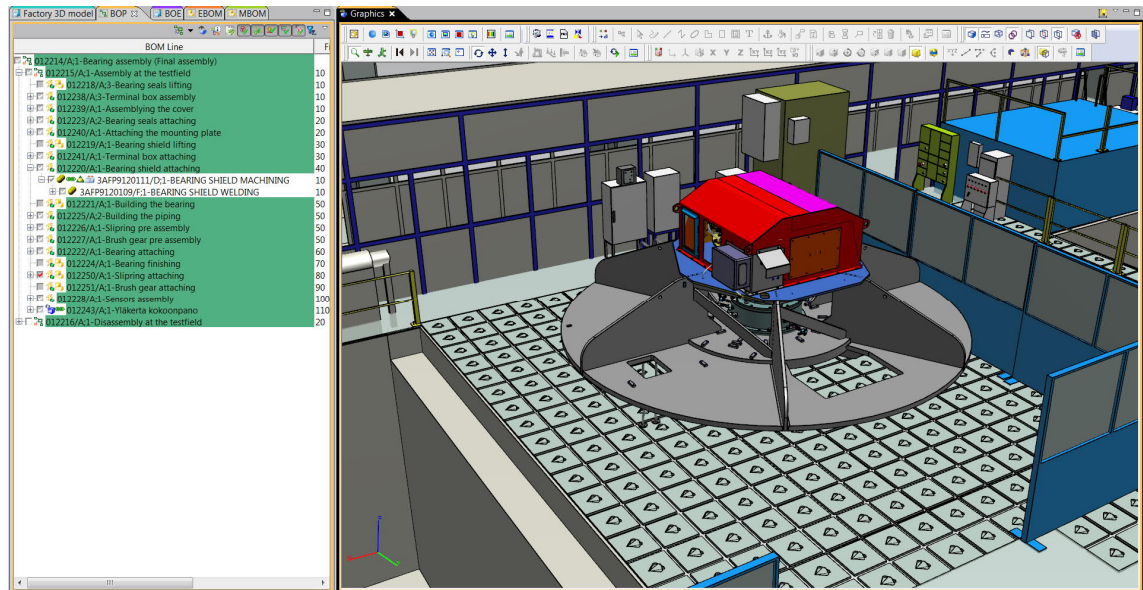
Visualization of the bearing assembly BOP in the factory layout.
